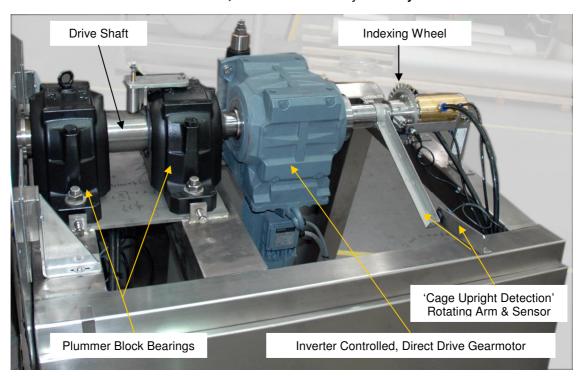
Blender (right side) - Rotating Cage shaft, bearing blocks and gearmotor
